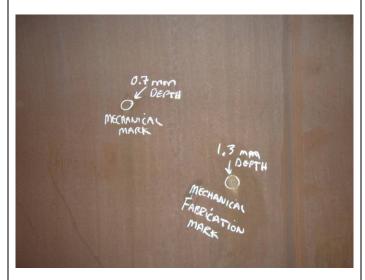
Mechanical marks on interior shell just south of circ weld #3, looking West
